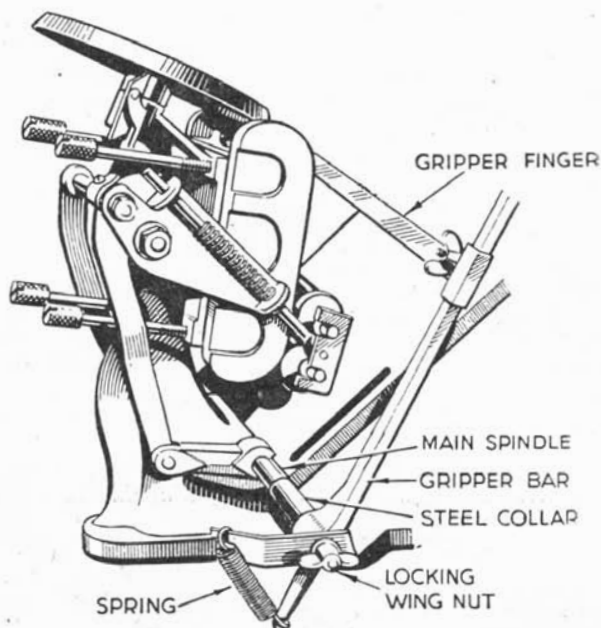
Gripper Finger attachments on No. 1 High Speed Machine.
